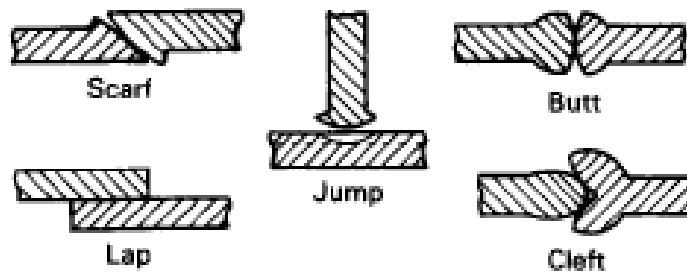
Typical joint configurations used for manual forge welding applications. Source: Ref 1
